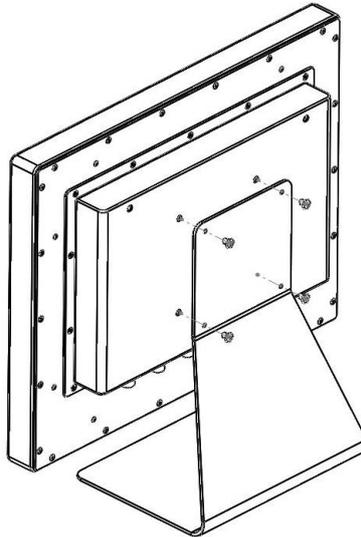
AEx-8XXP (H) Series VESA Mounting
